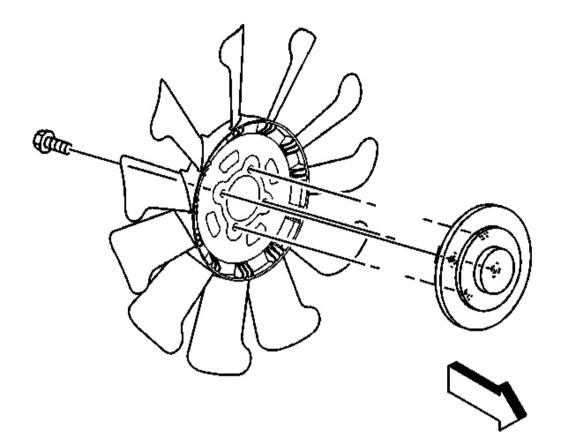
Fan Clutch & Fan Blade Courtesy of GENERAL MOTORS CORP.
